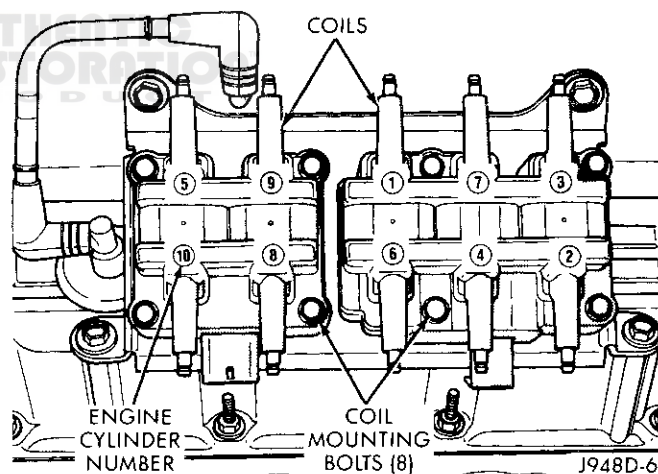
Ignition Coil Packs—8.0L V-10 Engine
